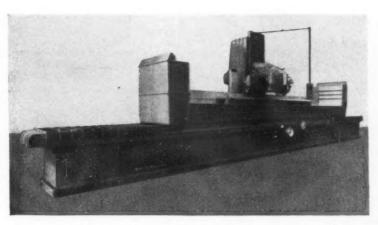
Zocca type RPA 6000 hydraulic slideway grinder
